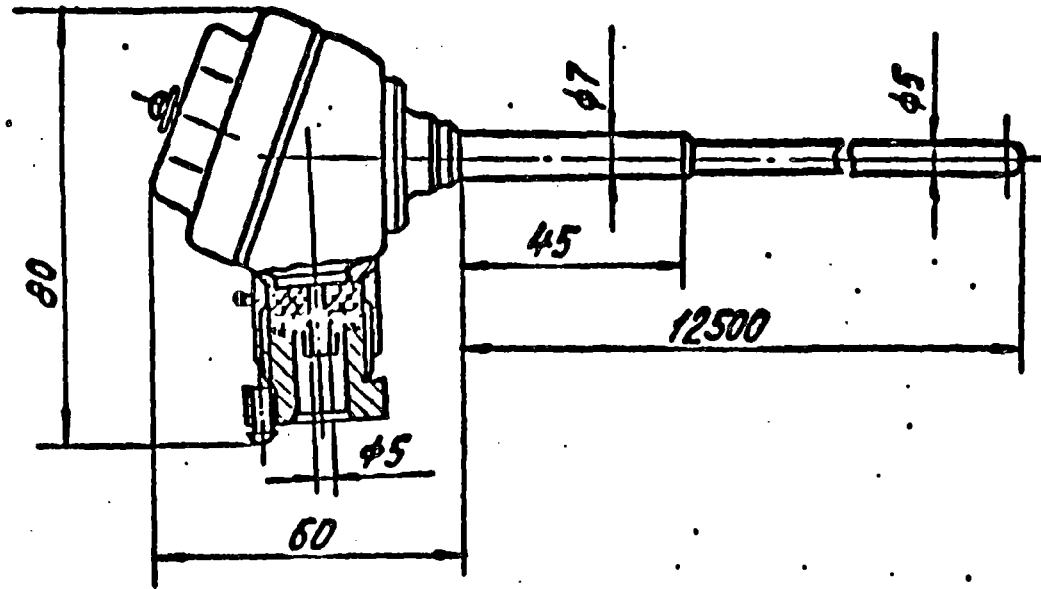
A dimensional drawing of a chromel alumel thermocouple with a head
